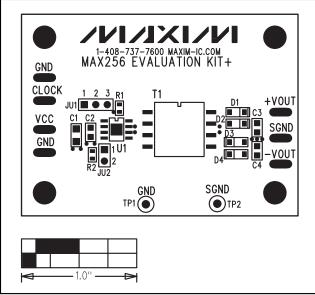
MAX256 EV Kit Component Placement Guide— Component Side
